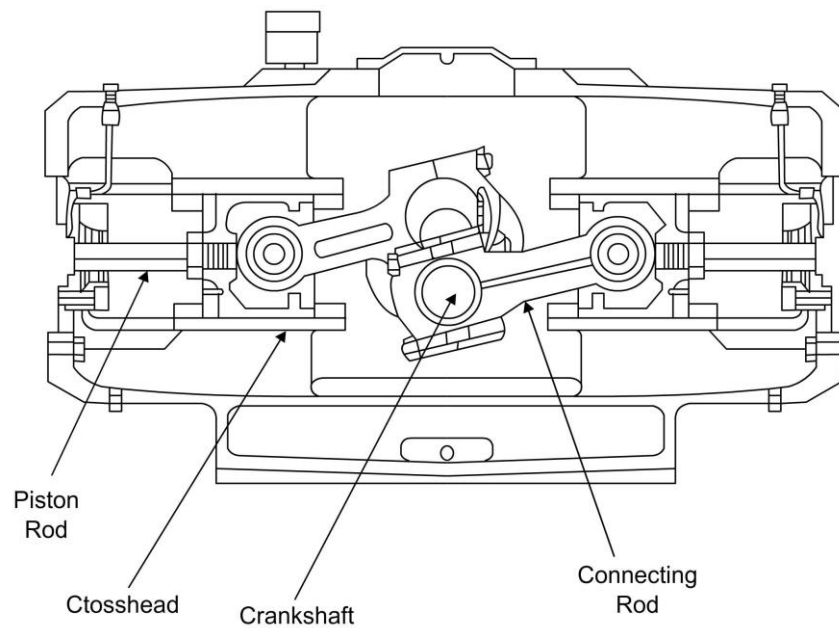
Schematic diagram showing crankshaft, connecting rod, crosshead and piston rod
